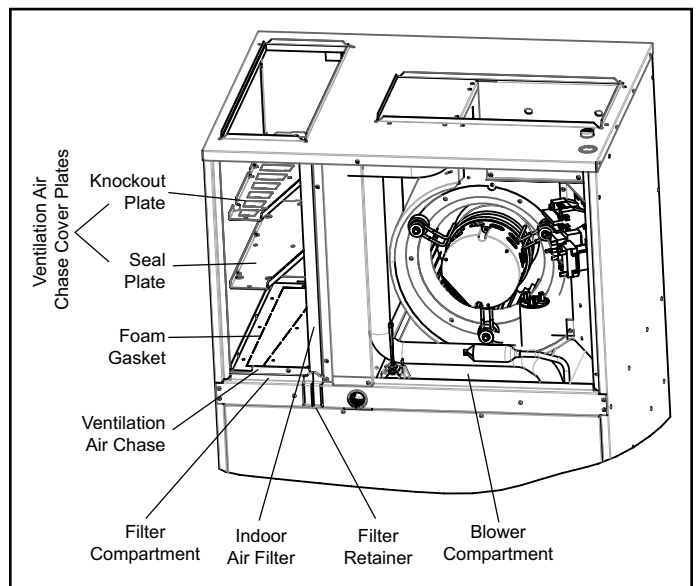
Access Panel & Ventilation Chase Cover Plate Removal
